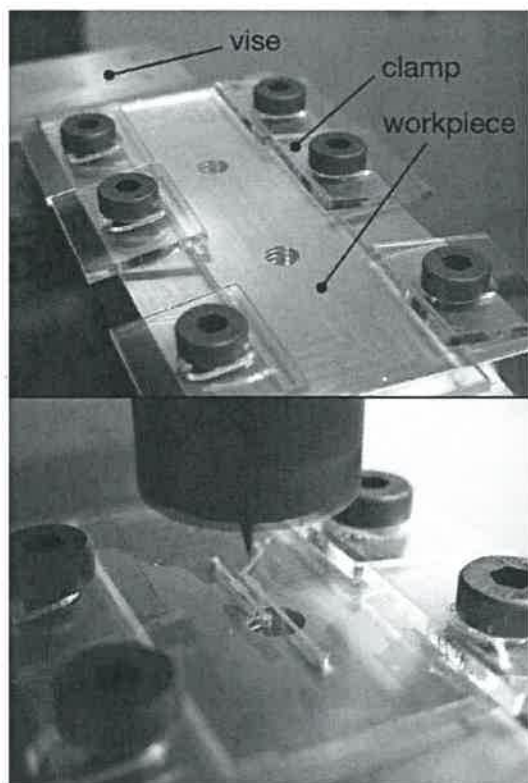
An aluminum fixture allows repeatable positioning and acrylic clamps tightly grip workpiece (above). A 125 µm diameter endmill pockets a PCR device in less than 5 min (below).
